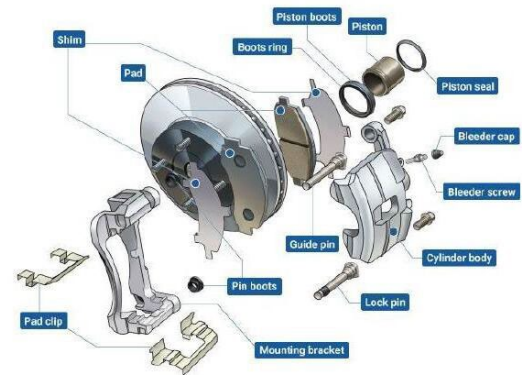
Exploded view of a disc-brake assembly showing rotor, pads, calliper and mounting hardware
